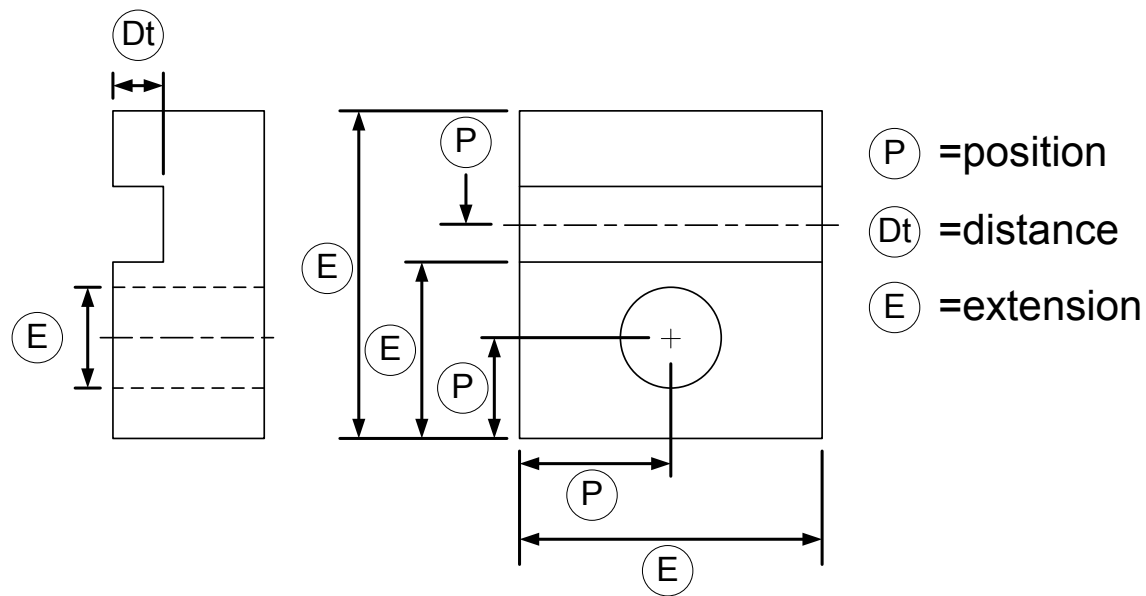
Position, distance, and extension are used to quantify the dimensions of a machine part.
